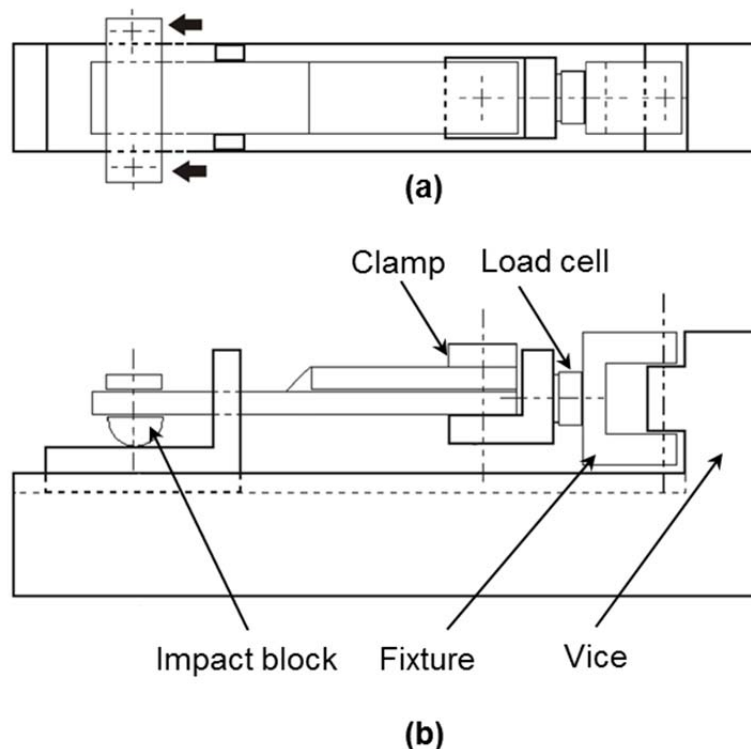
Schematic of specimen fixture for impact fatigue. (a) Top view, arrows denote impact loading direction, (b) Side view
